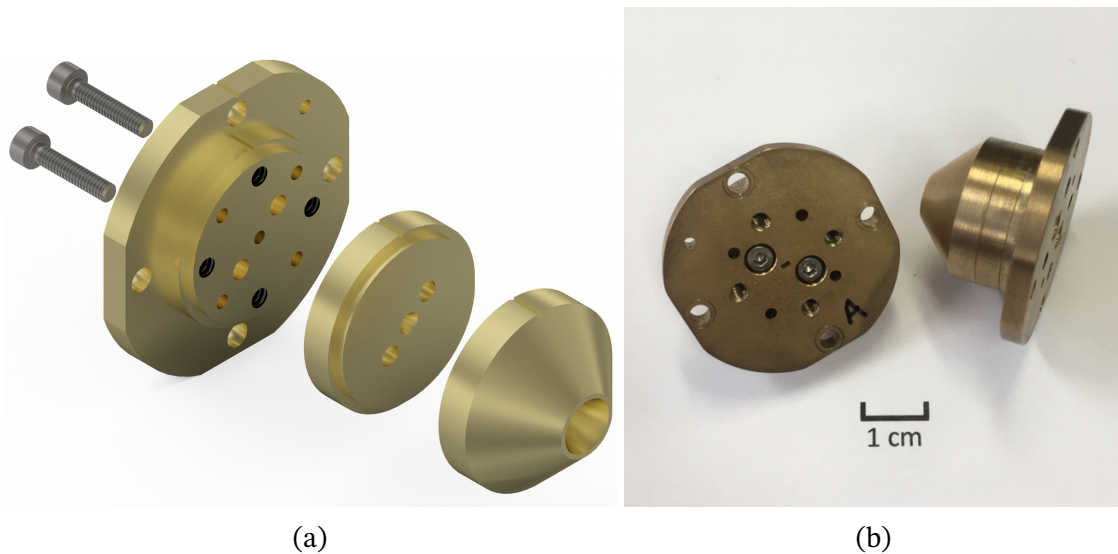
(a) An exploded view CAD rendering of the GOLA horn and (b) a photograph of both manufactured units with scale, first published in Vattulainen et al. [23].
